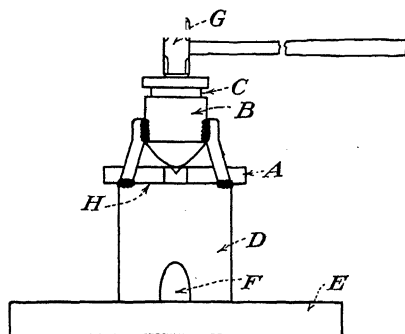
Machine for nick-breaking weld coupons. A. Weld coupon. B. Guide. C. Ram. D. Heavy-duty pipe. E. Steel base. F. Opening to remove coupon. G. Sledge hammer. H. Notch cut in pipe top to hold coupon.
